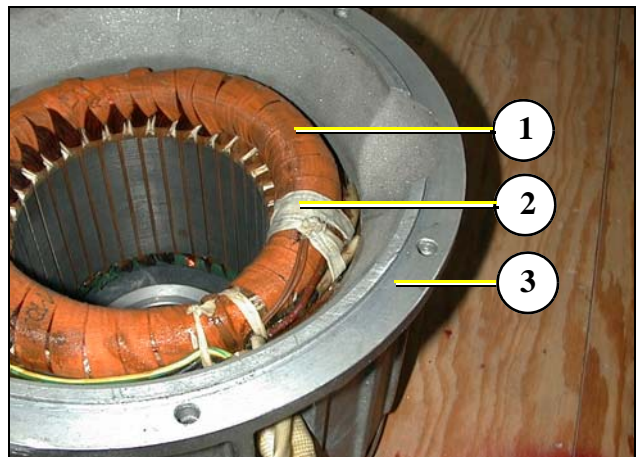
Thermo-switch in the Generator Winding
